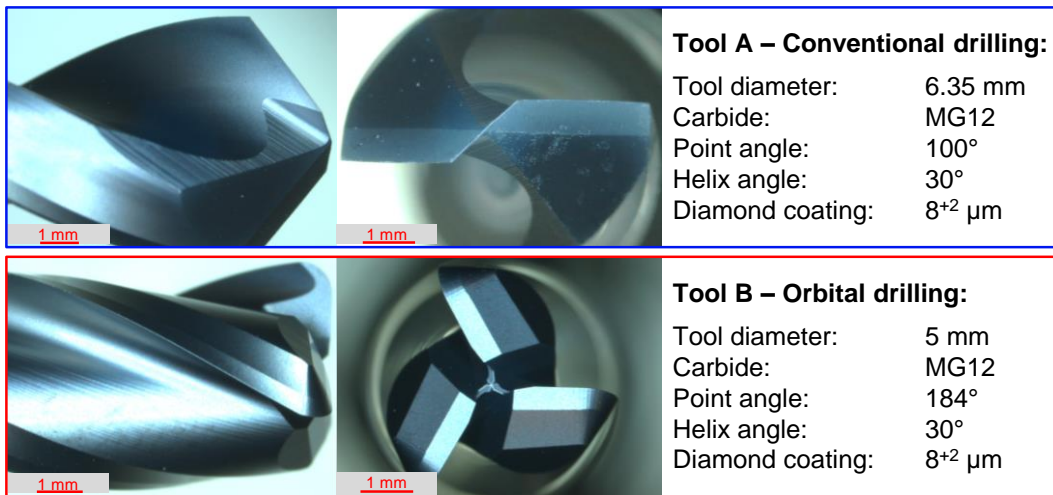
Side view and top view of diamond-coated conventional (A) and orbital drilling (B) tools; published in [233]
